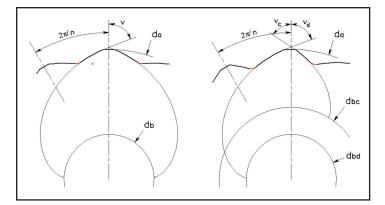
Direct Gear Design tooth profile definition; right – symmetric tooth; left – asymmetric tooth; d_a – tooth tip circle diameter; d_b – base circle diameter; n– involute intersection profile angle; subscripts "d" and "c" are for the drive and coast flanks of the asymmetric tooth.
